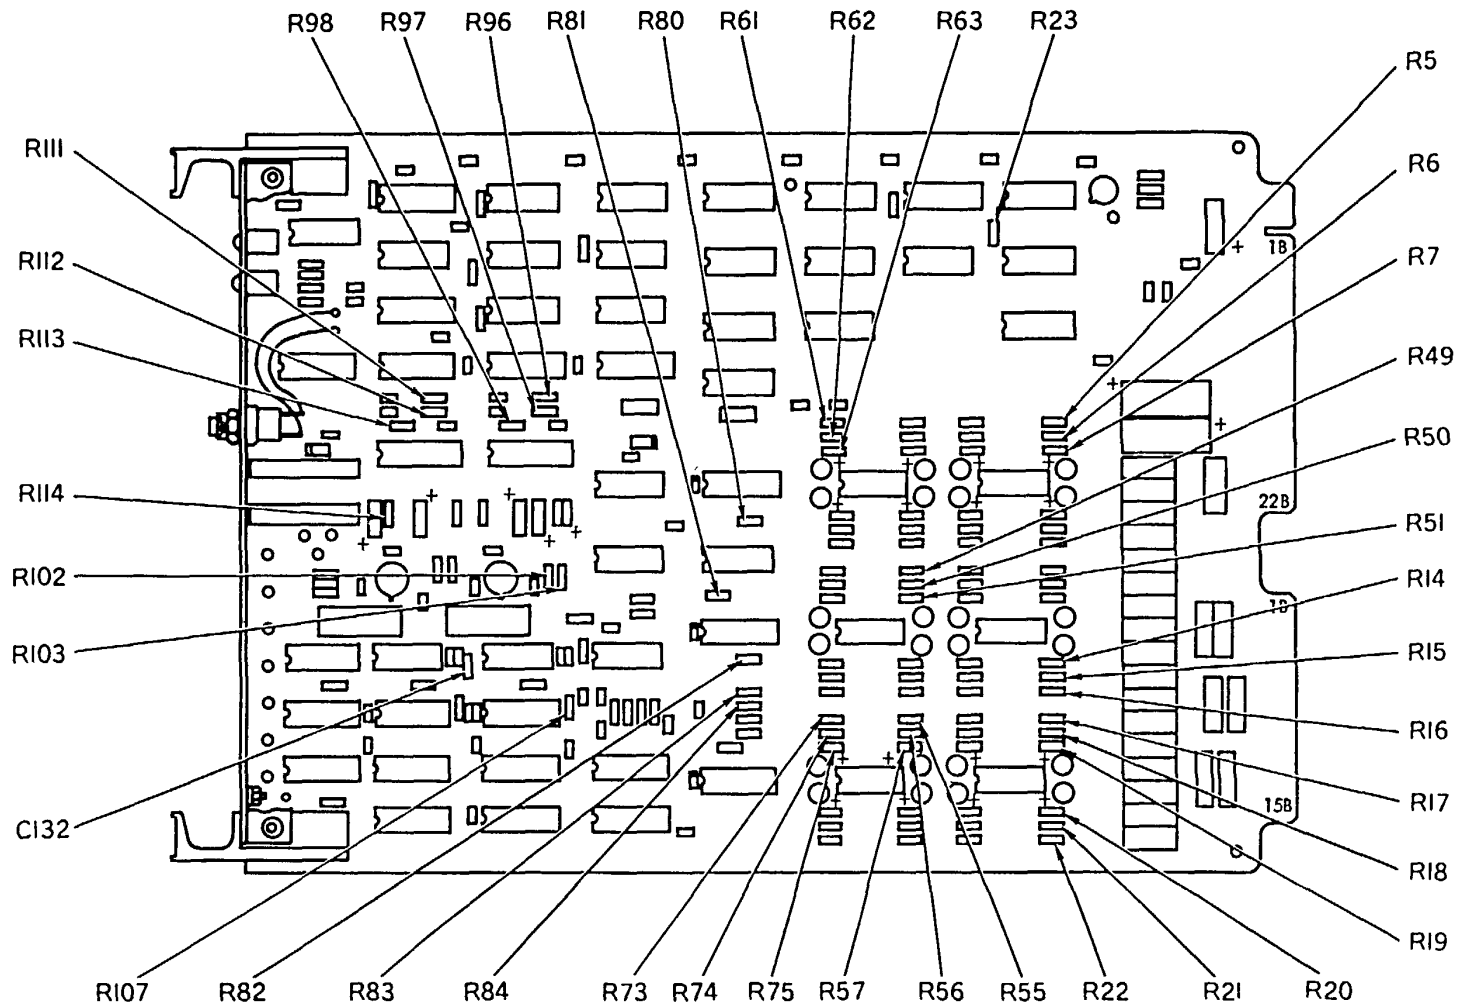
PCM unit parts location diagram (sheet 2 of 14) PCM02 and PCM04.
